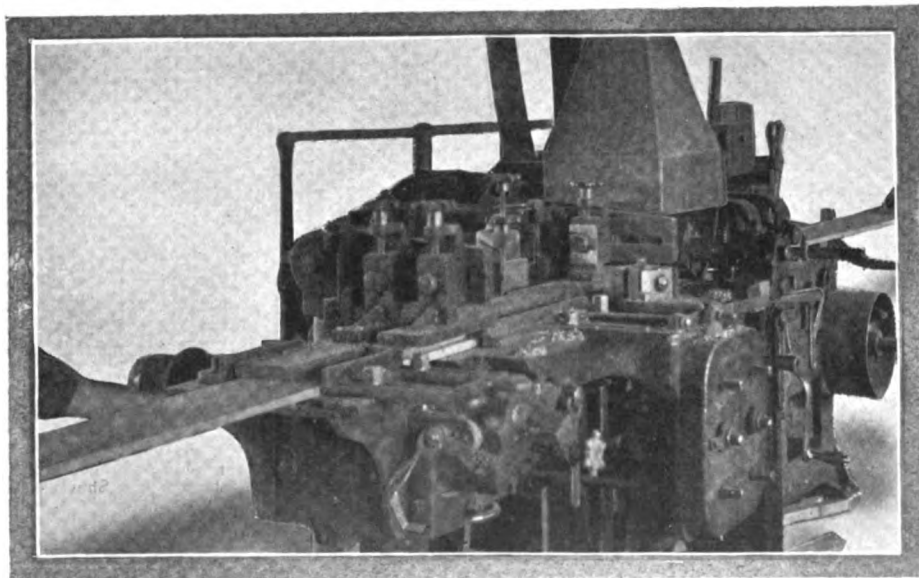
Showing the process of planing the sill-shaped pieces after kiln-drying
